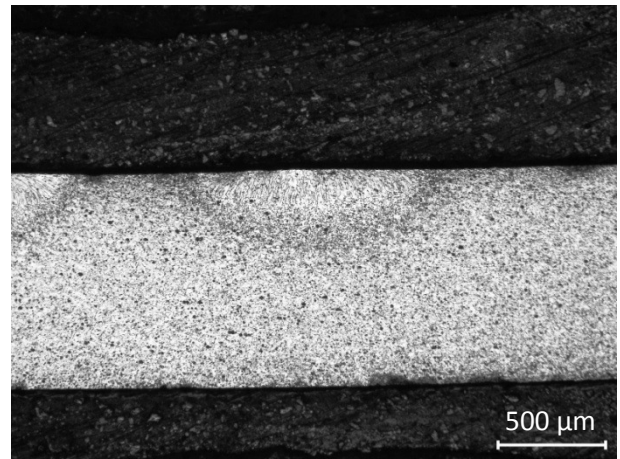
4th series of NiTi pulsed mode beads on plate – macrograph of weld bead #1
